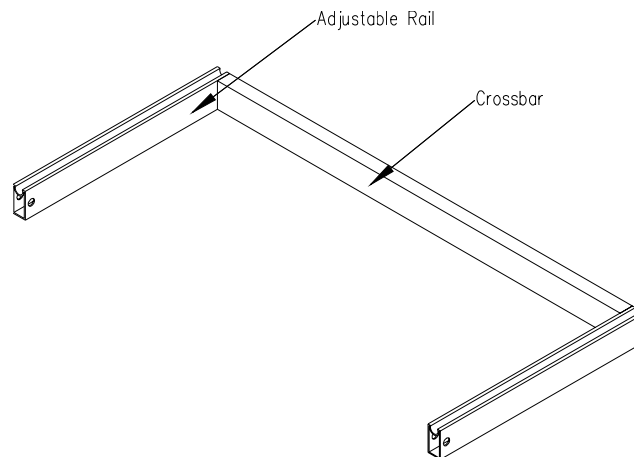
One crossbar is welded to the inside of the parallel adjustable rails at the end furthest from the mounting end
